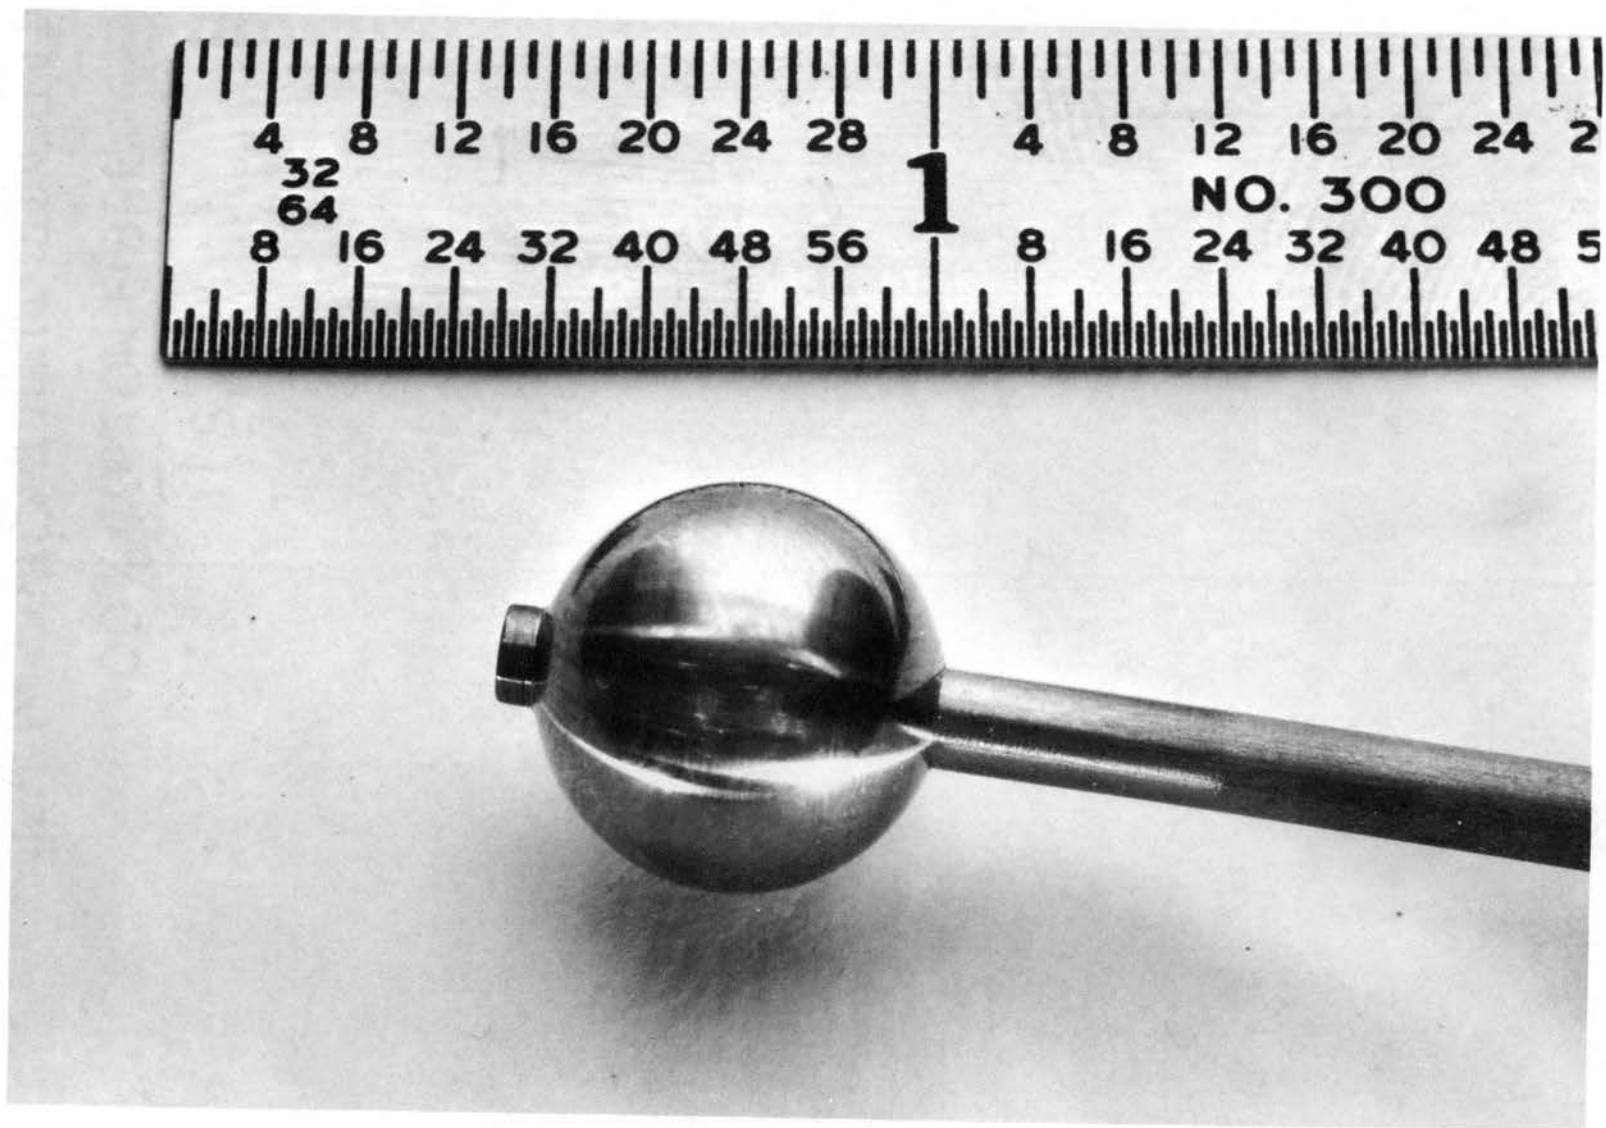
Tantalum Sphere and Support Tube - Before Welding.
